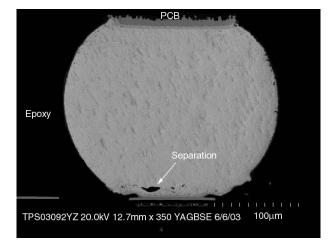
Typical Lead-Free BLR Solder Fatigue Crack
